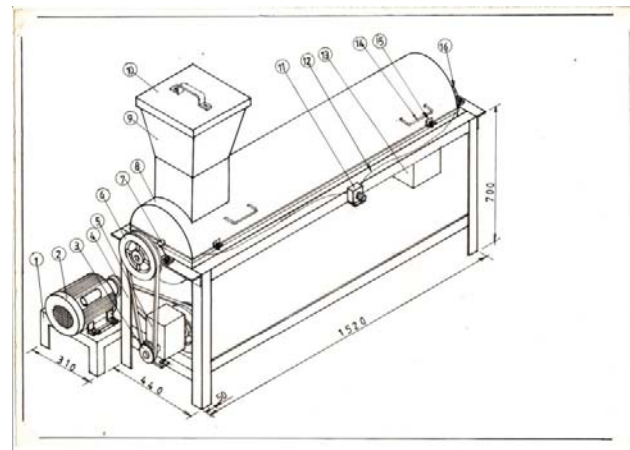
Isometric View of the Roasting Machine: 1-Electric motor stand, 2-Electric motor, 3-Speed reduction pulley, 4-Machine stand, 5-Speed reduction box, Machine pulley, 7-Conveyor shaft, 8-Roasting drum, 9-Feeding hopper, 10-Hopper lid, 11-Thermostat, 12-Thermocouple wire, 13-Kernel outlet, 14-Drum handle, 15-Drum flange, 16-Bearing housing
